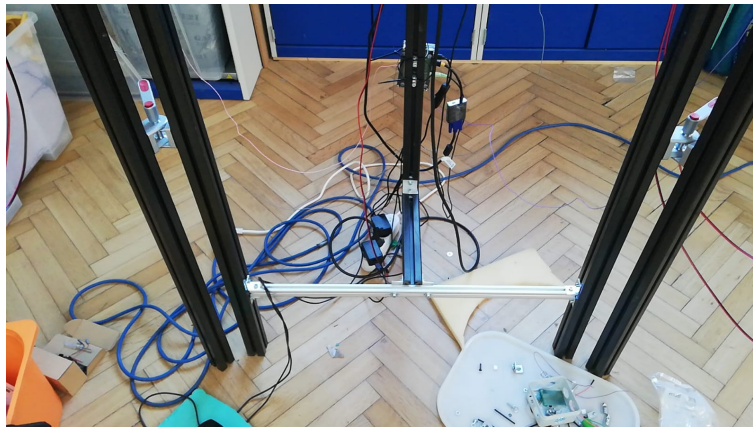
T-shaped joint used to fix the posterior vertical bar
